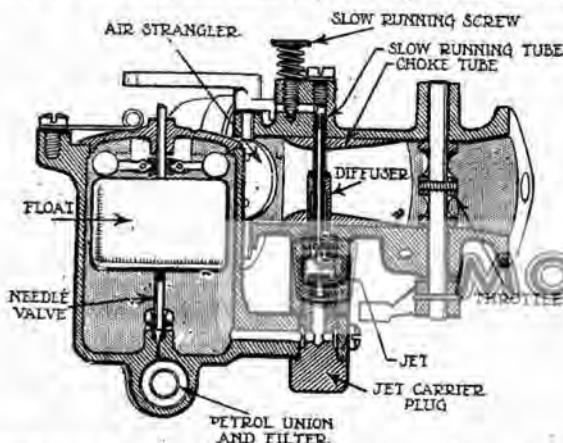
Section of the 1924 single-jet carburetter showing the various parts.
